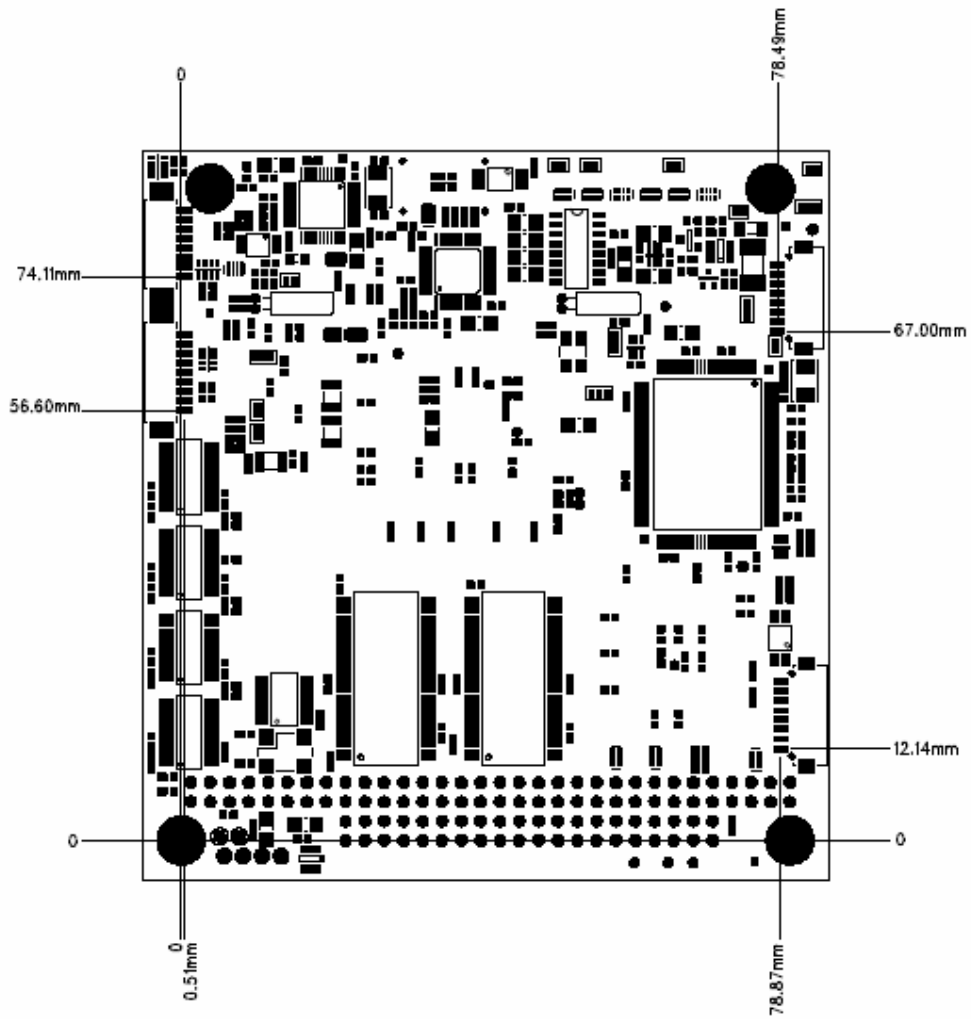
XA270 MECHANICAL DIMENSIONS
